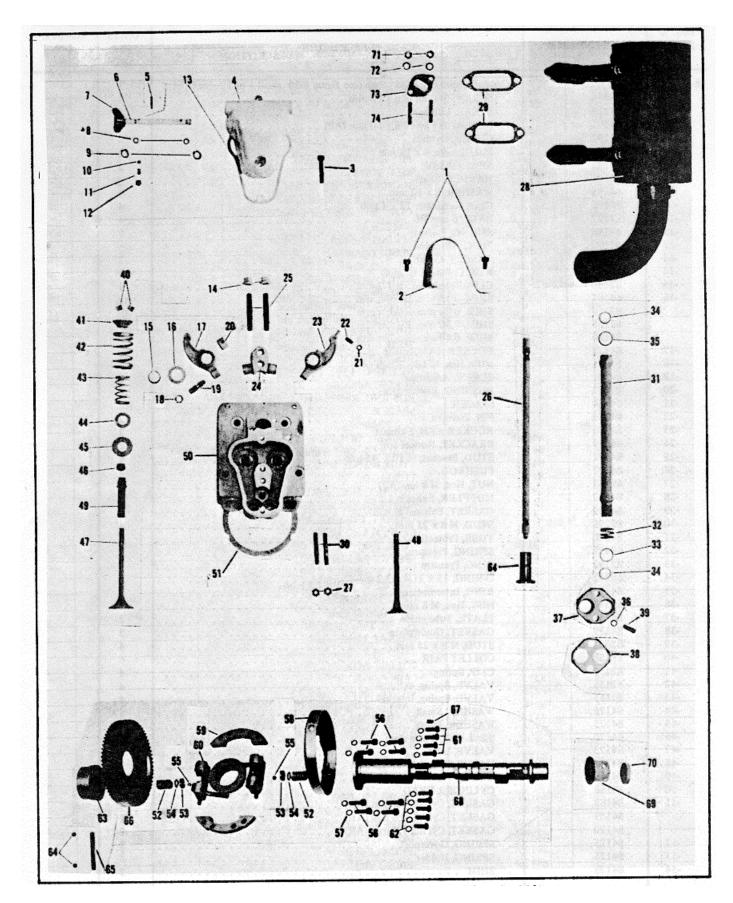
Cam, Pushrod and Head Group (Sheet 7 of 10) 8-67
